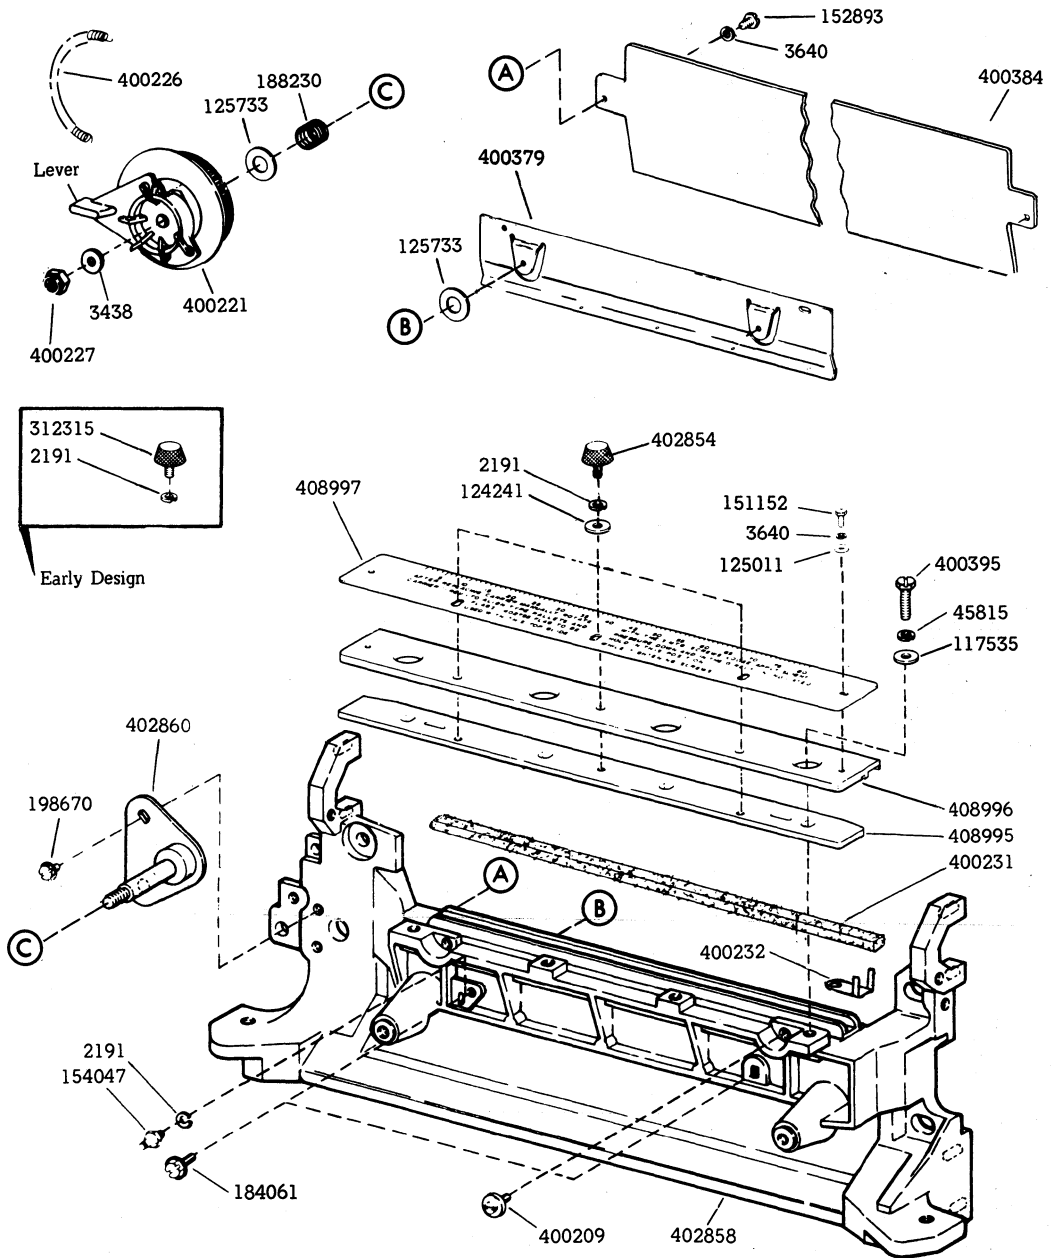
Front Casting Assembly (Friction Feed 40P101-Late Design)
